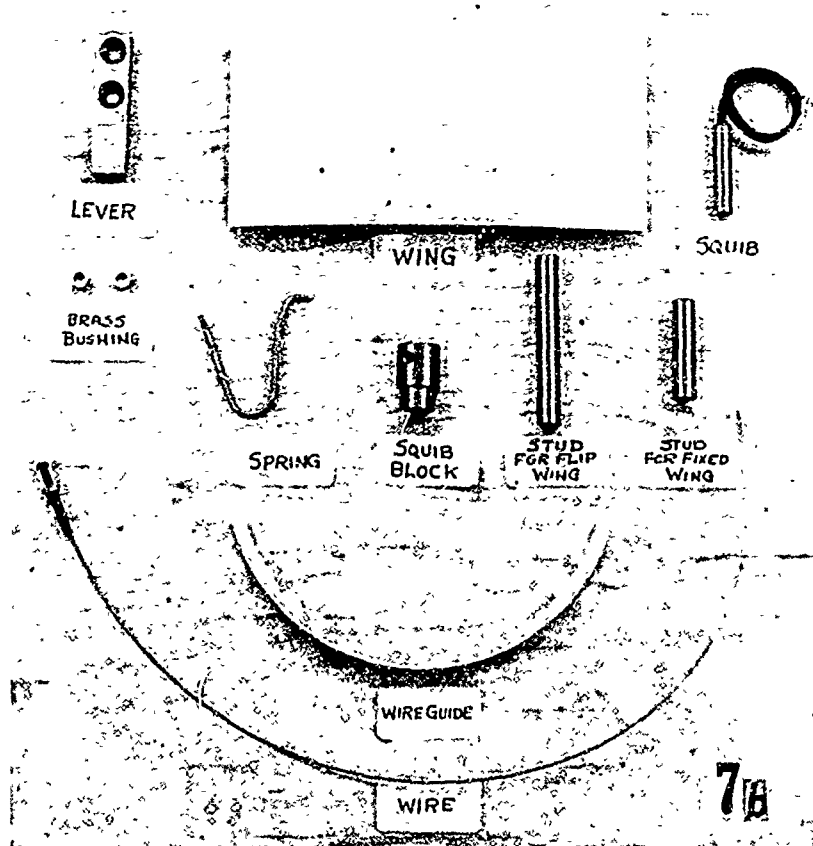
b. PARTS USED FOR THE WING FLIPPING ASSEMBLY.
